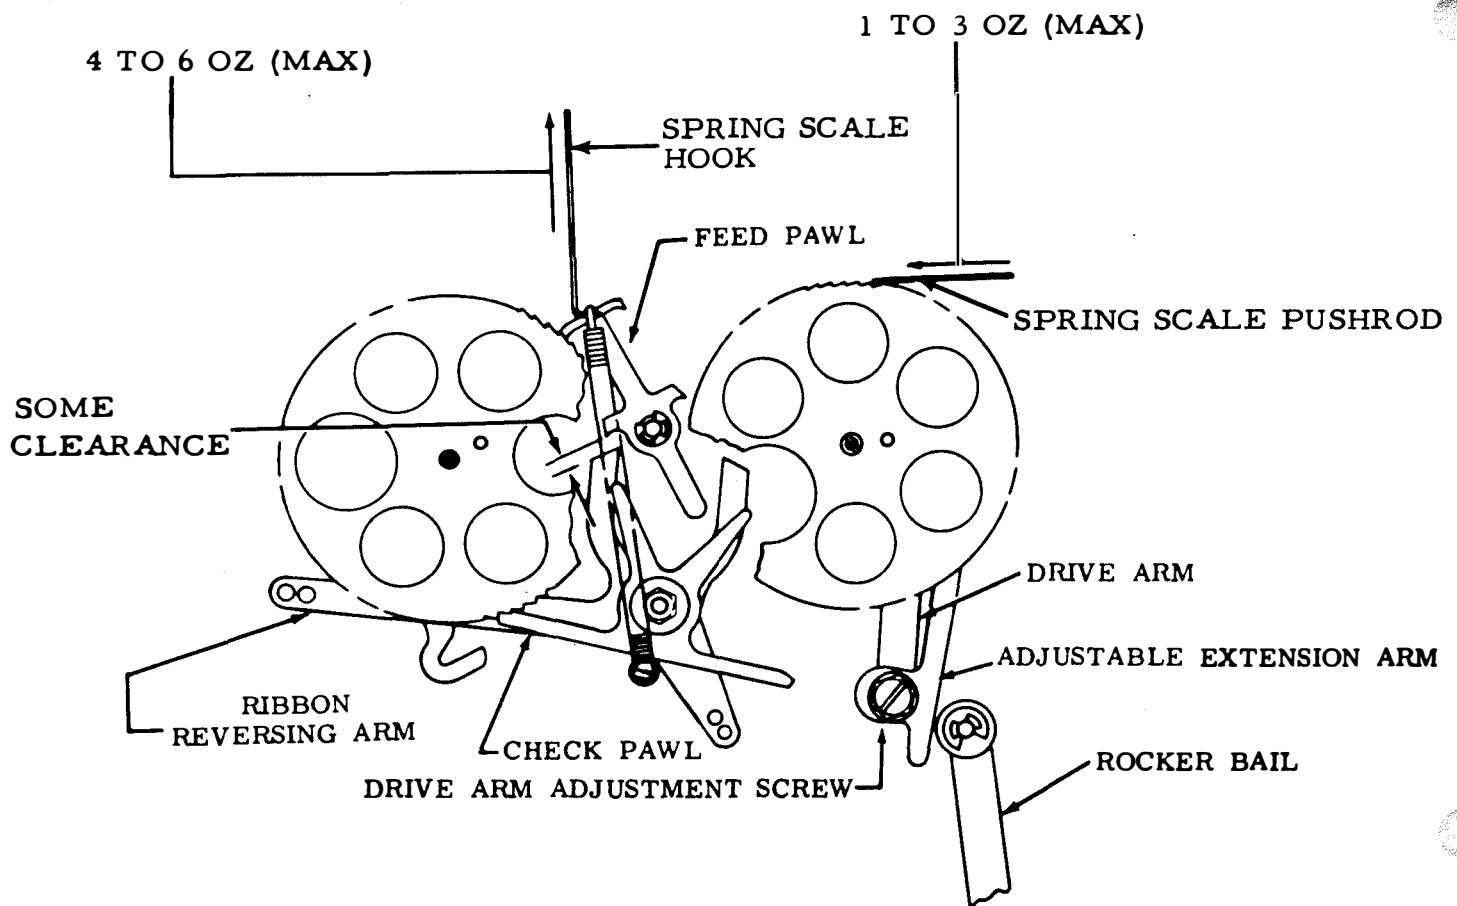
Feed Pawl Spring, Ratchet Wheel Torque Spring and Drive Arm
